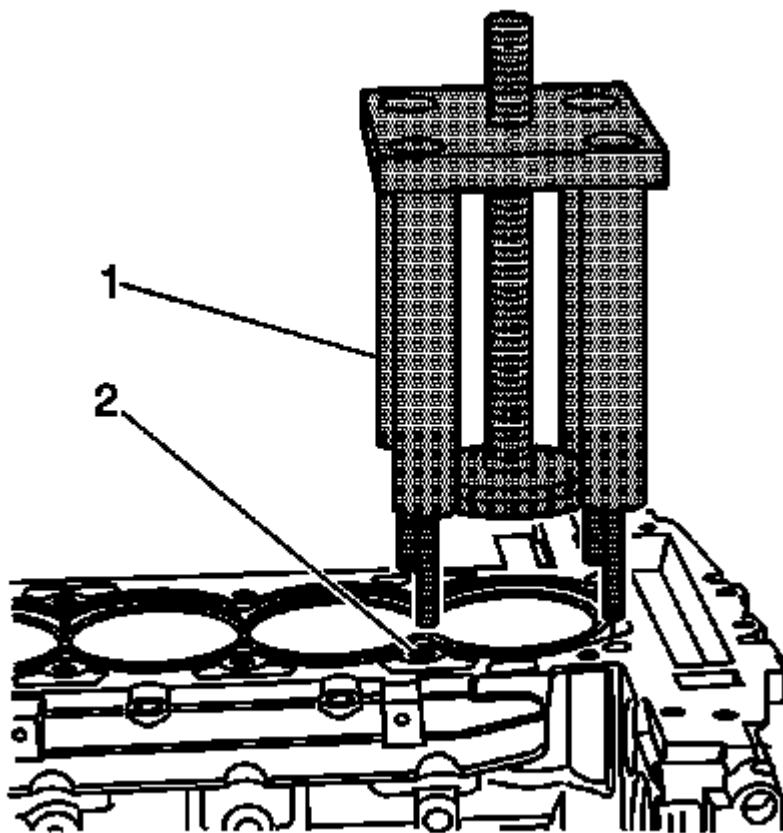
Identifying Cylinder Bore Sleeve Installer Assembly
